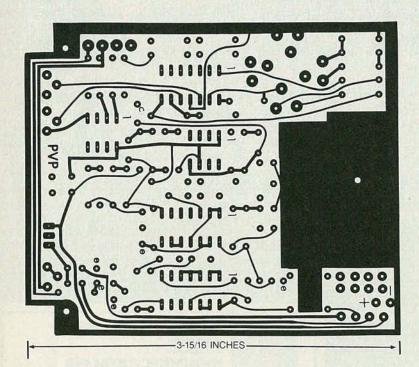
THE FOIL SIDE of the double-sided display PC board is shown here full sized. It's partsplacement diagram will be shown next month.
